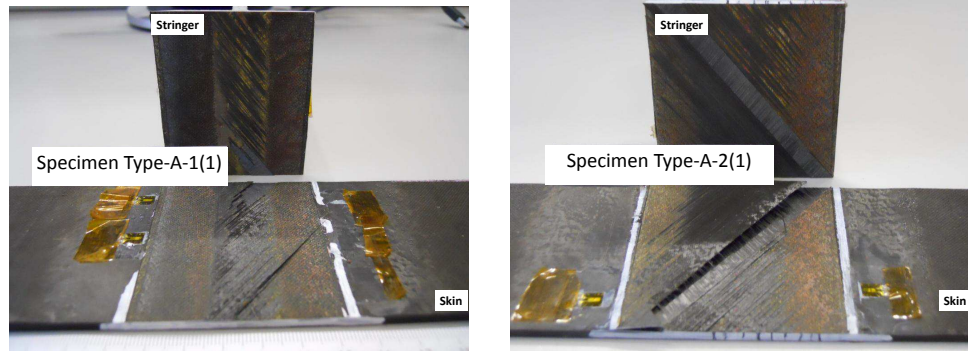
Fracture surfaces after test: Type-A-1(1) specimen and Type-A-2(1) specimen
